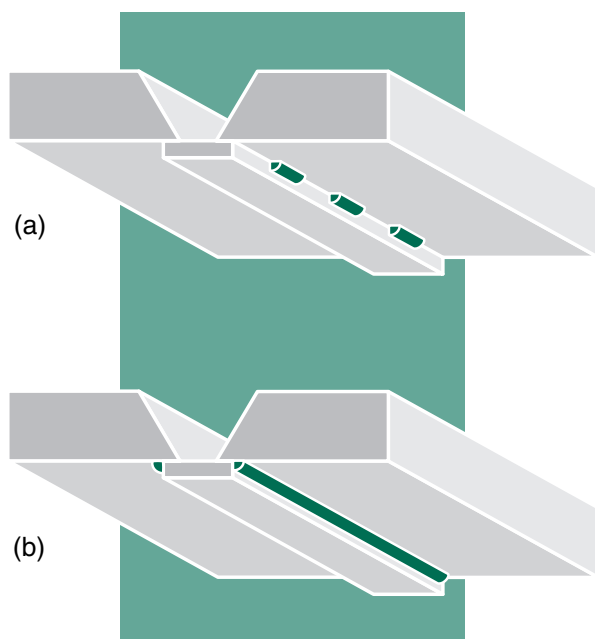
Non-incorporated, intermittent (a) and continuous (b) tack welds.
